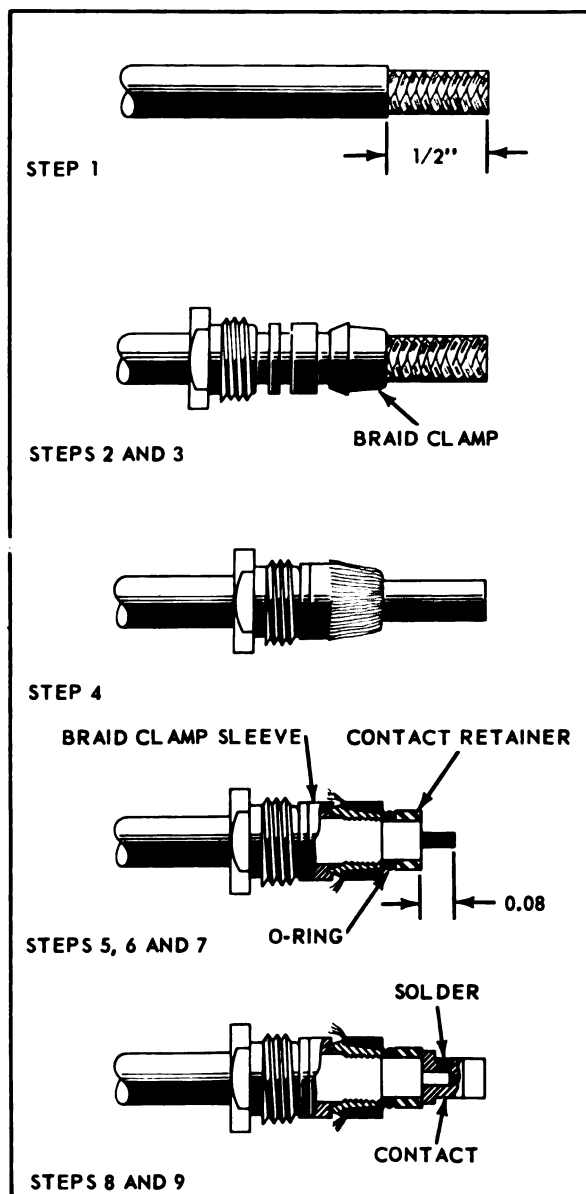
Attaching Nu-Line 1200 Series Connectors to Coaxial Cable
